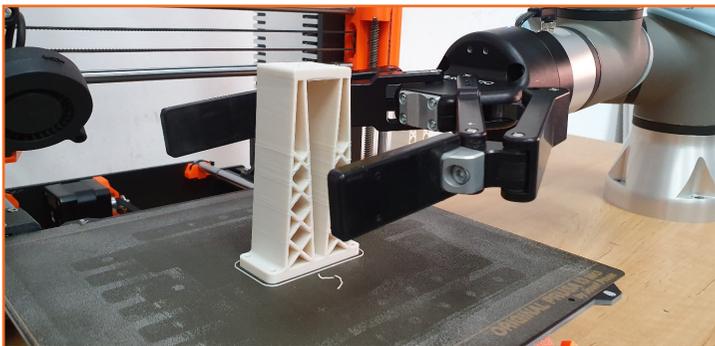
Equipment of the Department of Machine Design, Rzeszów University of Technology and the Team. Source: prof. dr hab. eng. G. Budzik
